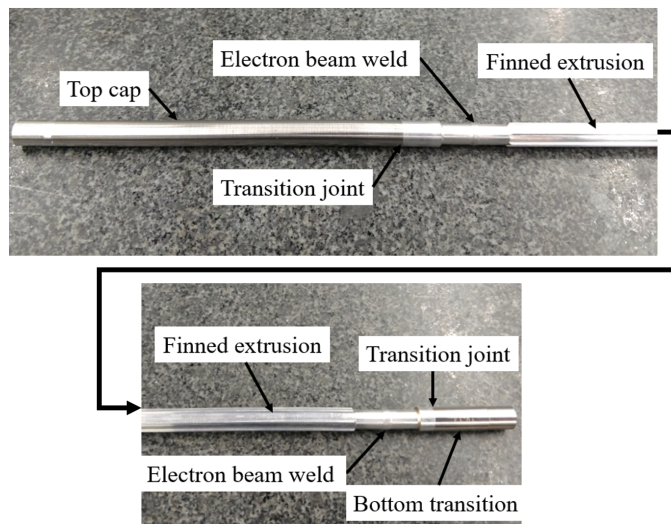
Gen II target containment with welding modifications.[15]
